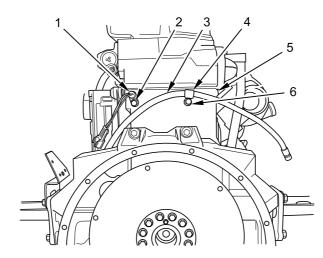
Exhaust Brake Solenoid and Fuel Filter Assembly Bracket.
